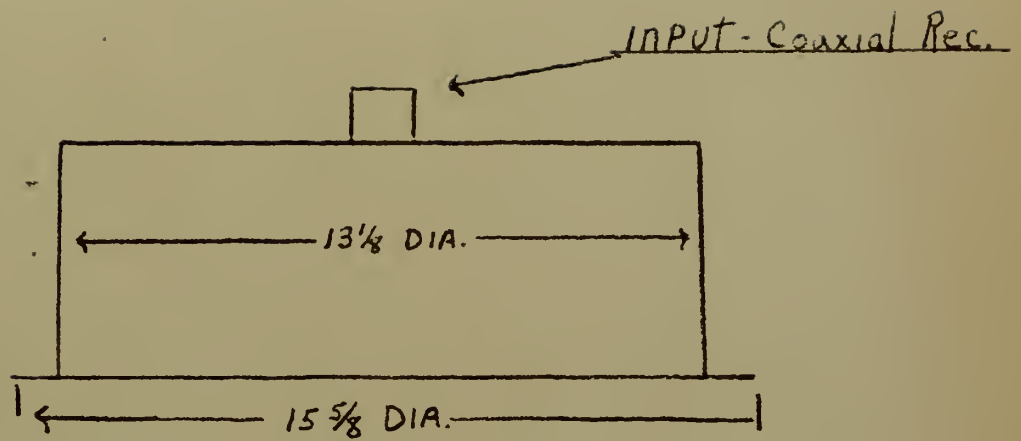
ANTENNA ASSEMBLY MOUNTING CAVITY
